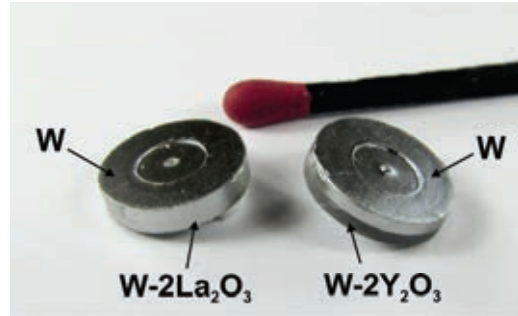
2-Component insert W-PIM: finished parts after heat-treatment.
